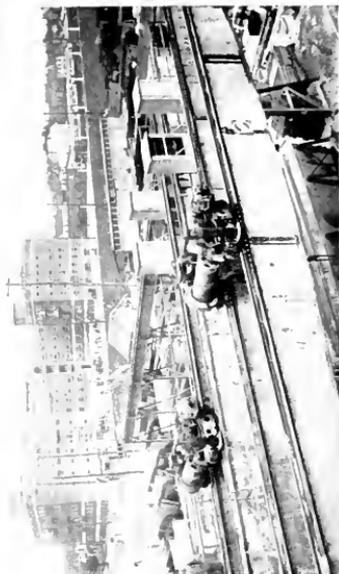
Traveling Bridge Crane, Newport News Shipbuilding & Dry Dock Corp., Newport News, Va. (Note houses for control panels)
